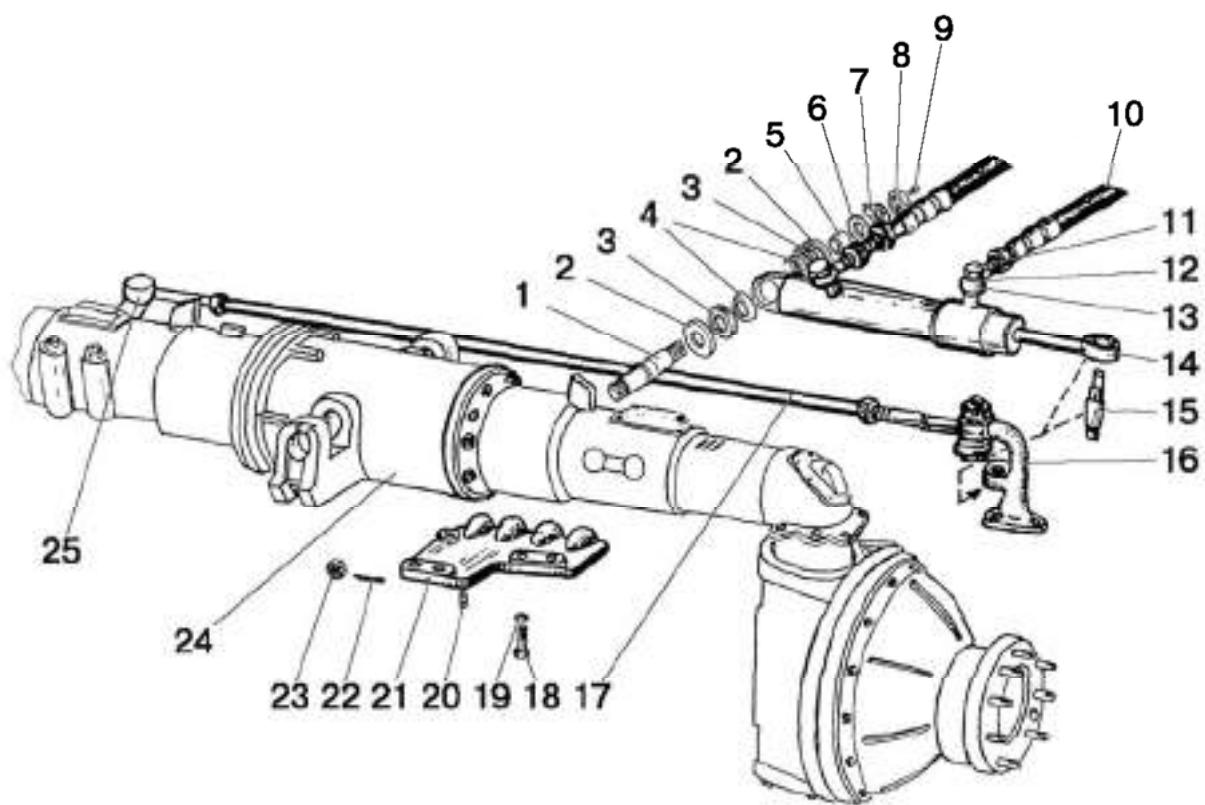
HPS hydraulic cylinder and fittings (FDA 72-2300020-A-04)
